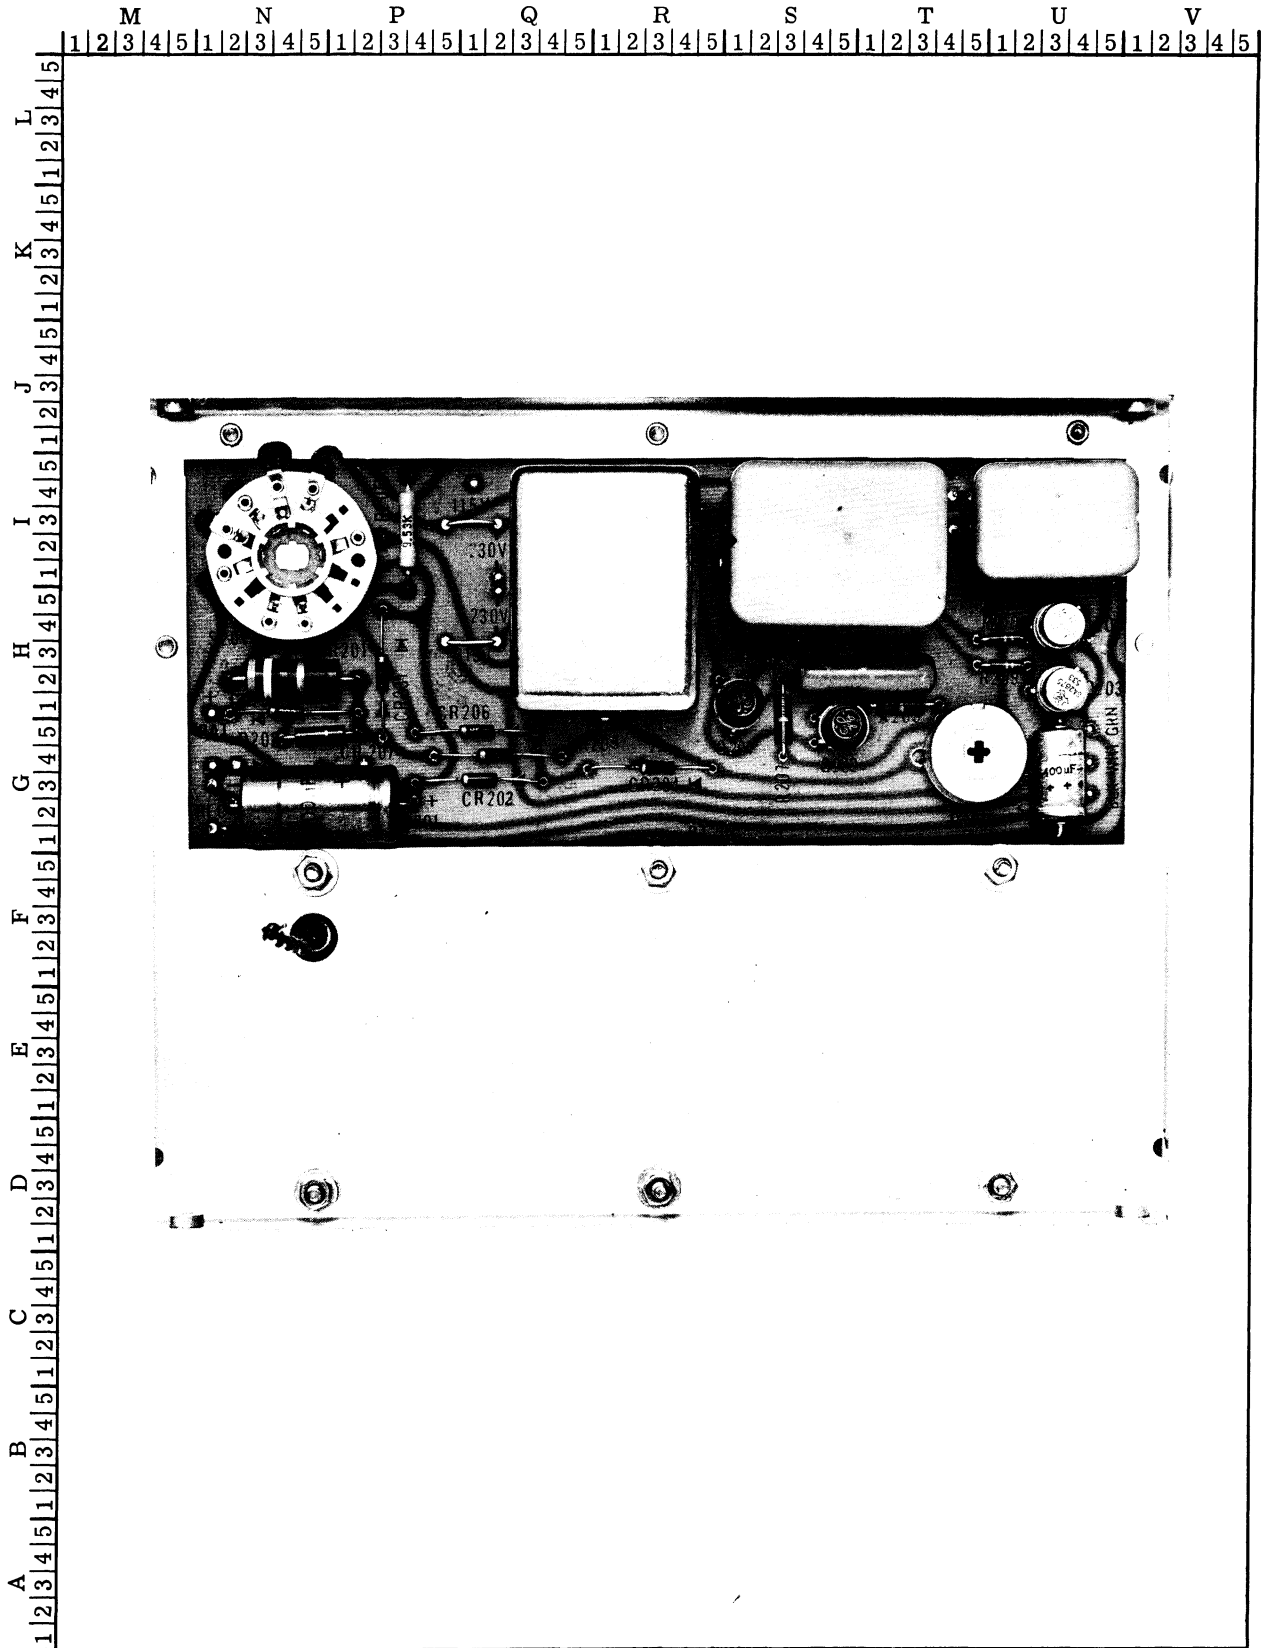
POWER SUPPLY P/C ASSEMBLY
